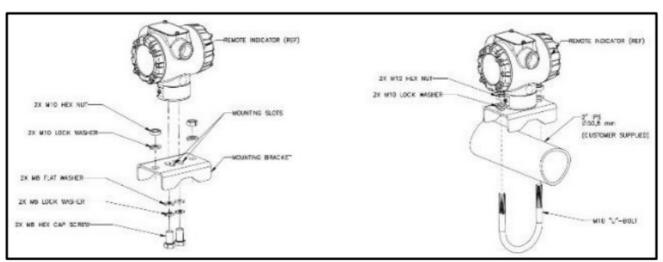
Pipe Mount - Horizontal Mounting Bracket
